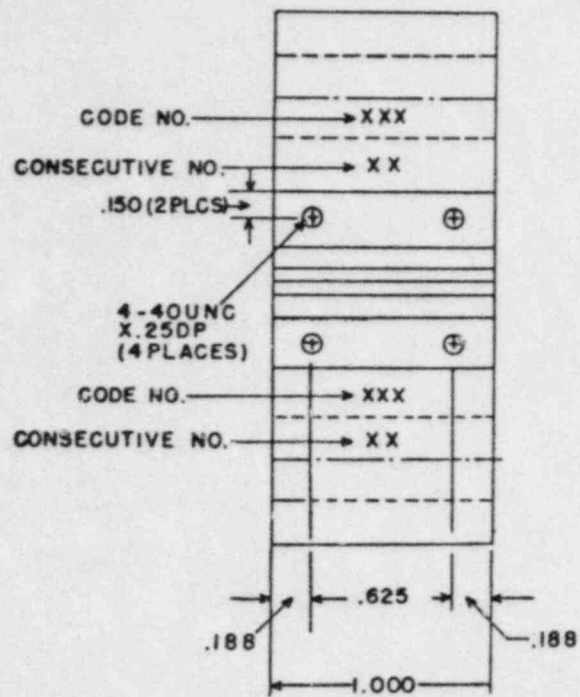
1T-CT compact tension specimen design. (Dimensions in inches, 1 in. = 2.54 cm.)
